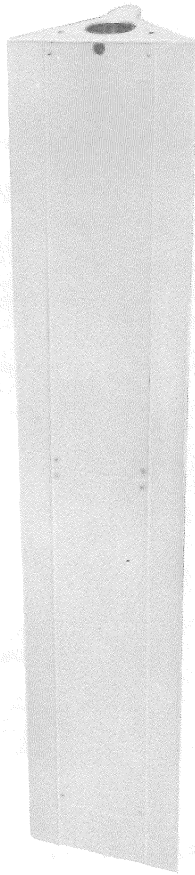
KS-19425, List 25 Lower Backboard Plate and Cover Assembly
